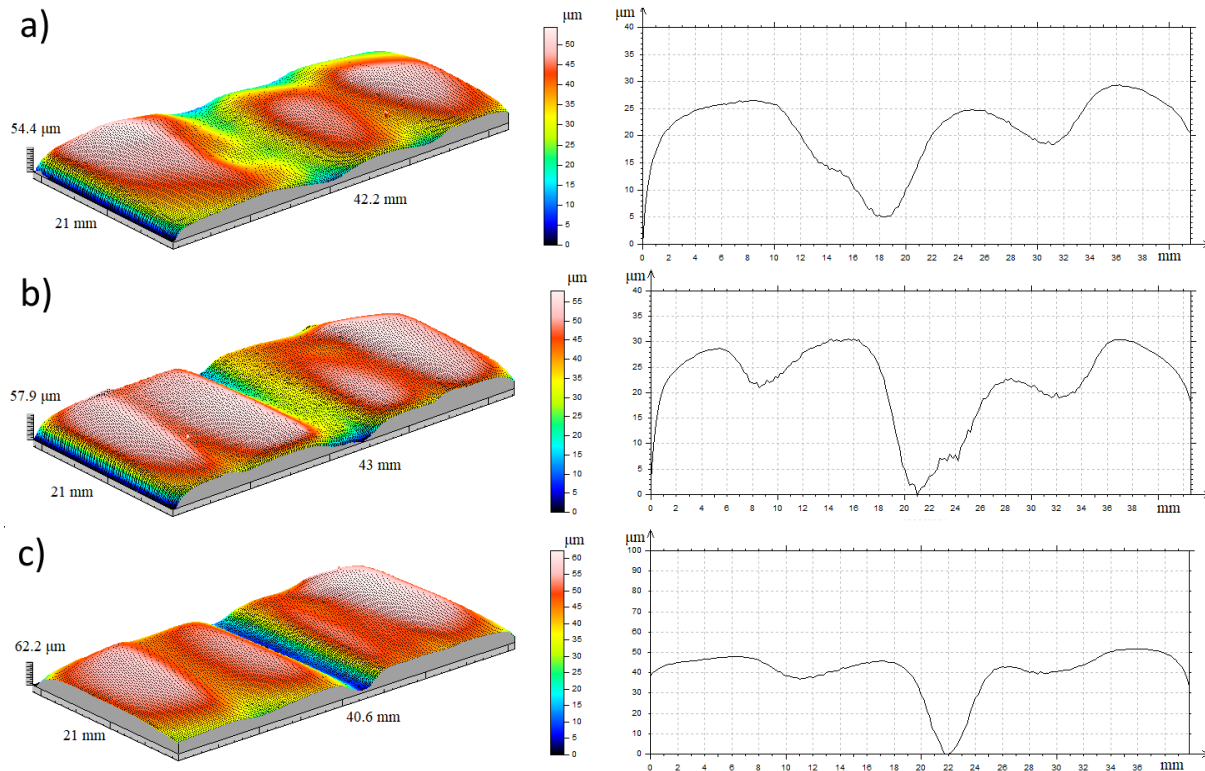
Specimen surface profiles: a) – specimen №1; b) – specimen №2; c) – specimen №3.
